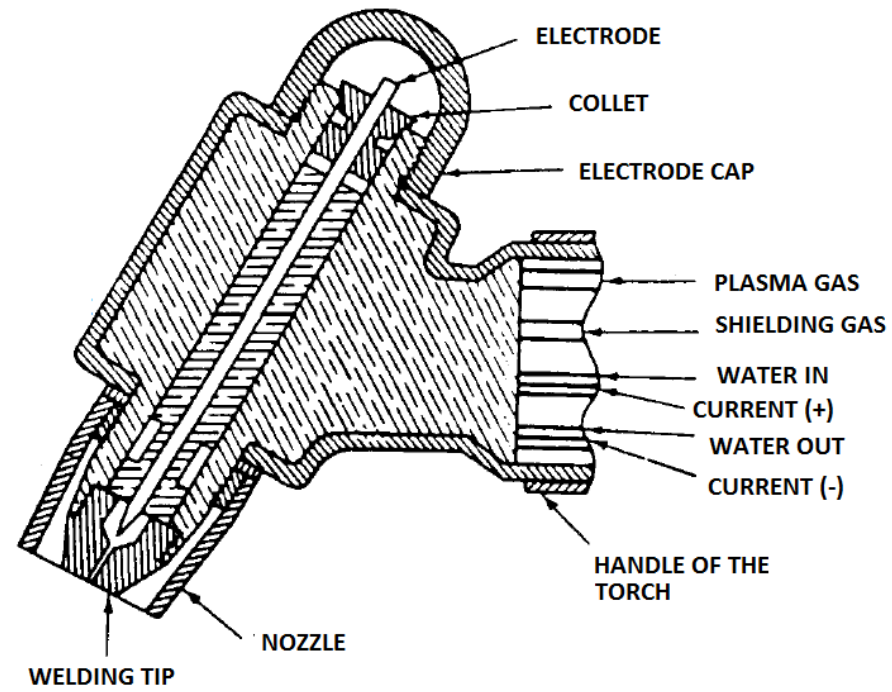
CUT SECTION OF A PLASMA ARC WELDING TORCH
